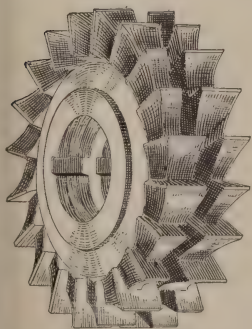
Interlocking side-milling cutter. Note the thin and thick "interlocking" sections.
